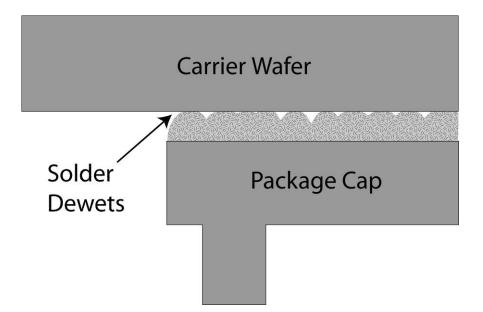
Illustration of the solder transfer process. The solder consumes the seed layer it was electroplated on, and then dewets the carrier wafer.
